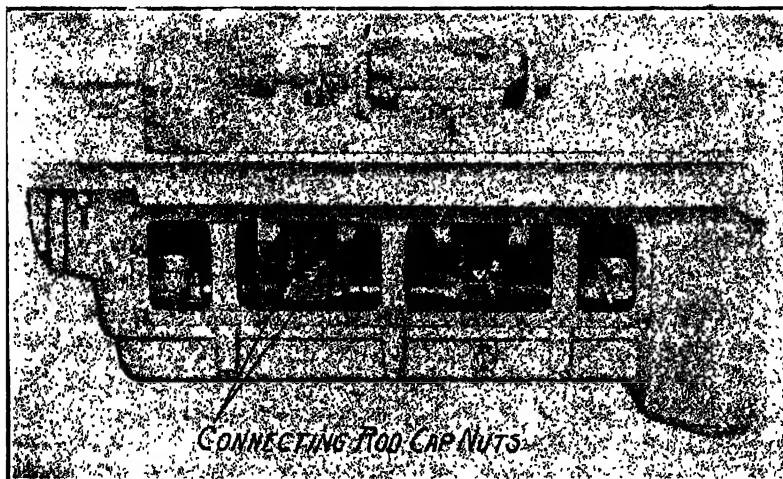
Showing how Connecting Rod Caps May be Reached Through Inspection Holes in the Side of the Crankcase.
